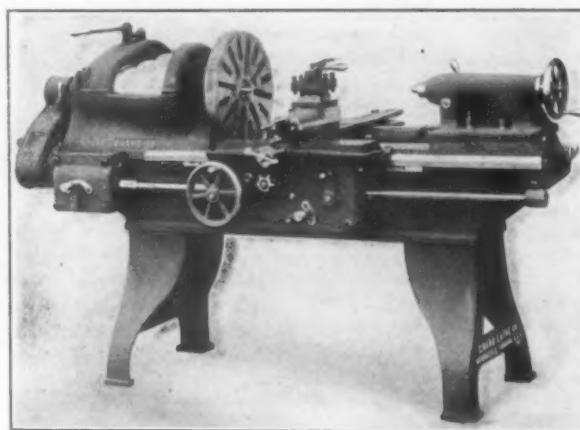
The Chard 18-In. Lathe with Semi-quick Change Gears, Compound Rest and Turret Tool Post.
